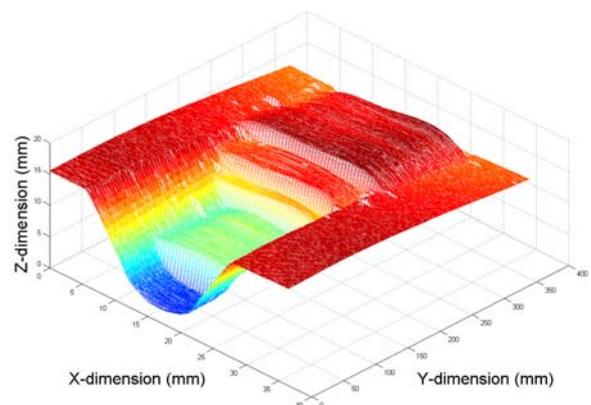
Measured bead geometry using 3D scanner (thickness 18mm, welding position 90°)
